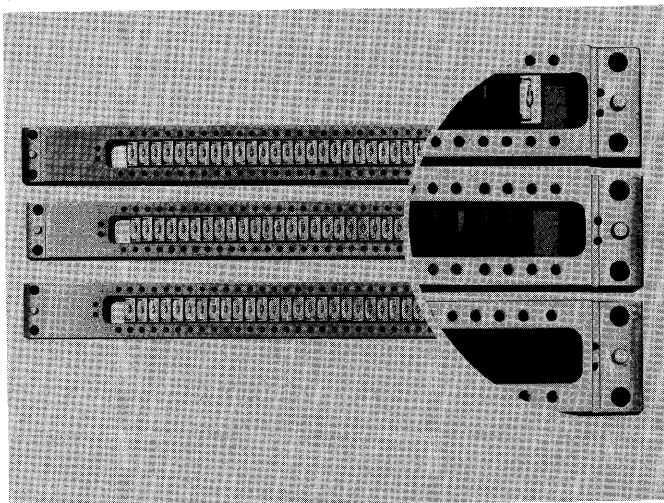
Typical Drum Head Bars 1, 3, and 5, Bottom View
